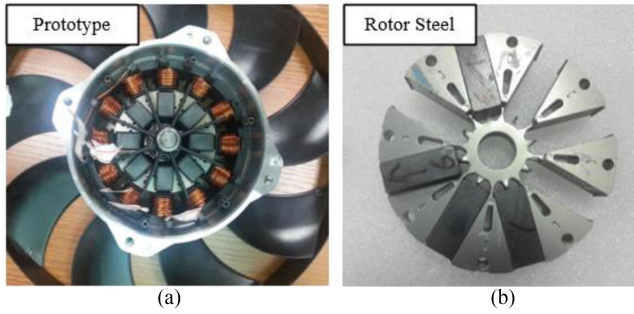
Prototype of the IPM electrical machines for fan blower. (a) Prototype. (b) Configuration of rotor.
